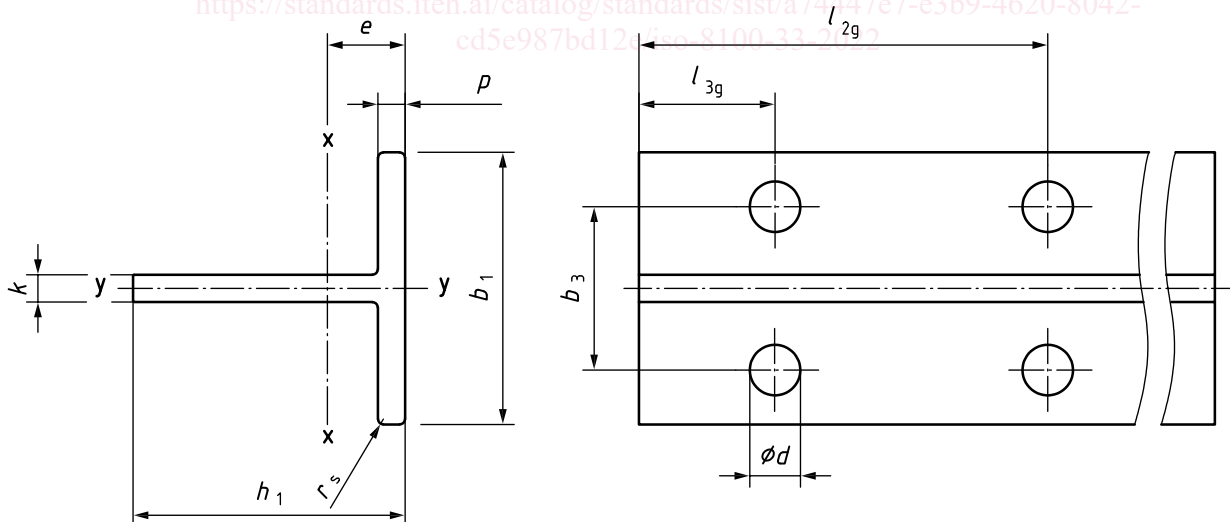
Cold-drawn, parallel foot-and-blade flange guide rail
